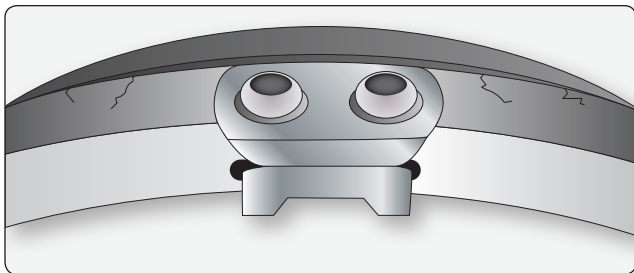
Inspection for cracks in the wheel disc drive key area is performed with dye penetrant on many wheels.
